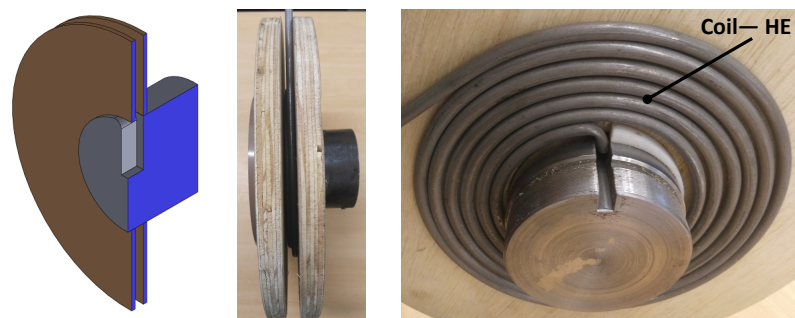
Spiral heat exchanger manufacture by shape-lathe process
